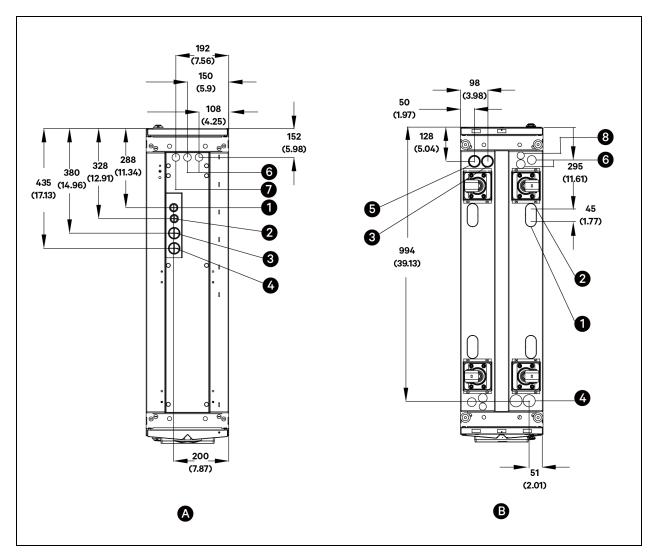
CRD25 - Location and Dimension of Pipe and Cable Outlets on Top Plate and Base Plate
